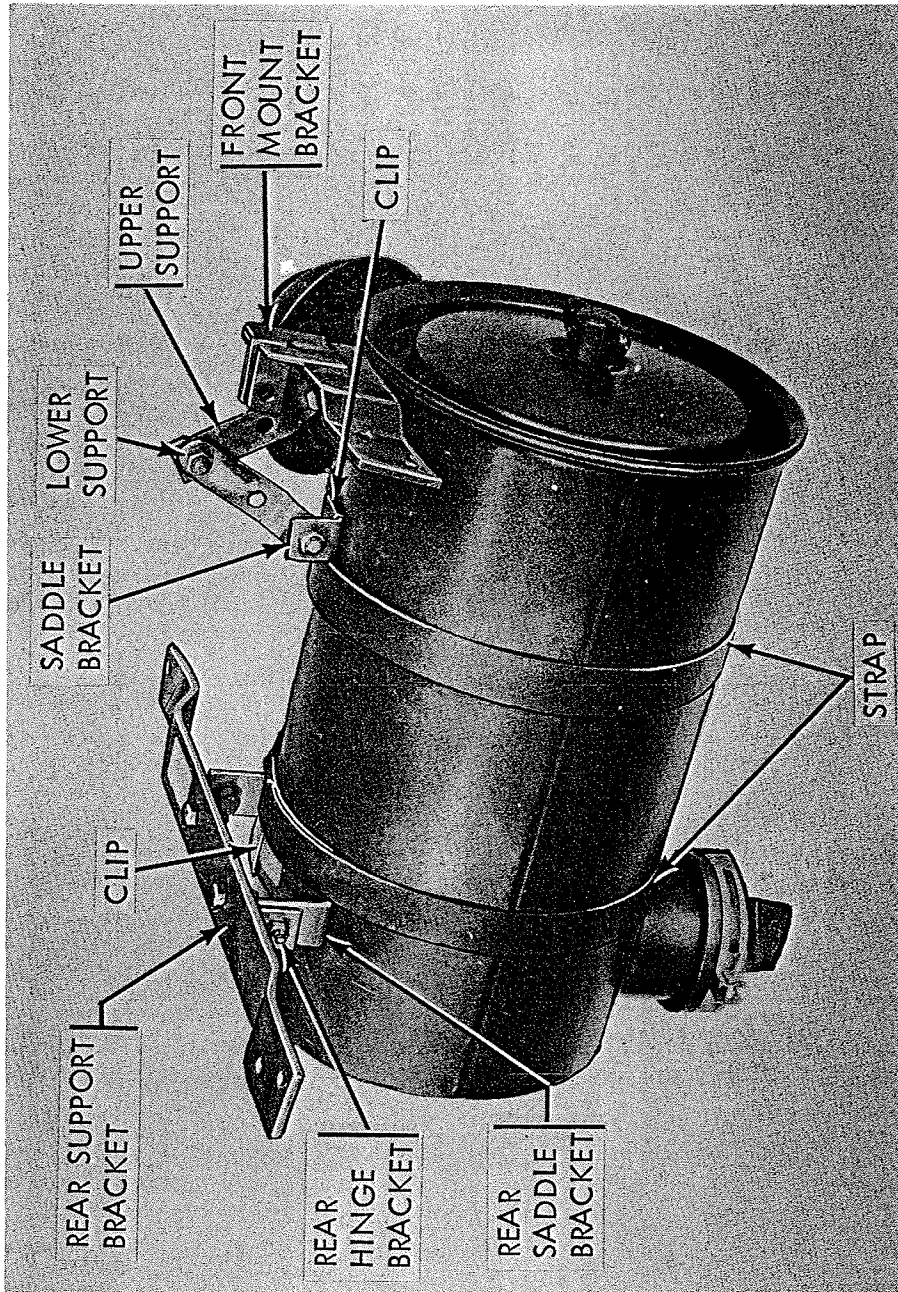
AIR CLEANER MOUNTING BRACKETS
